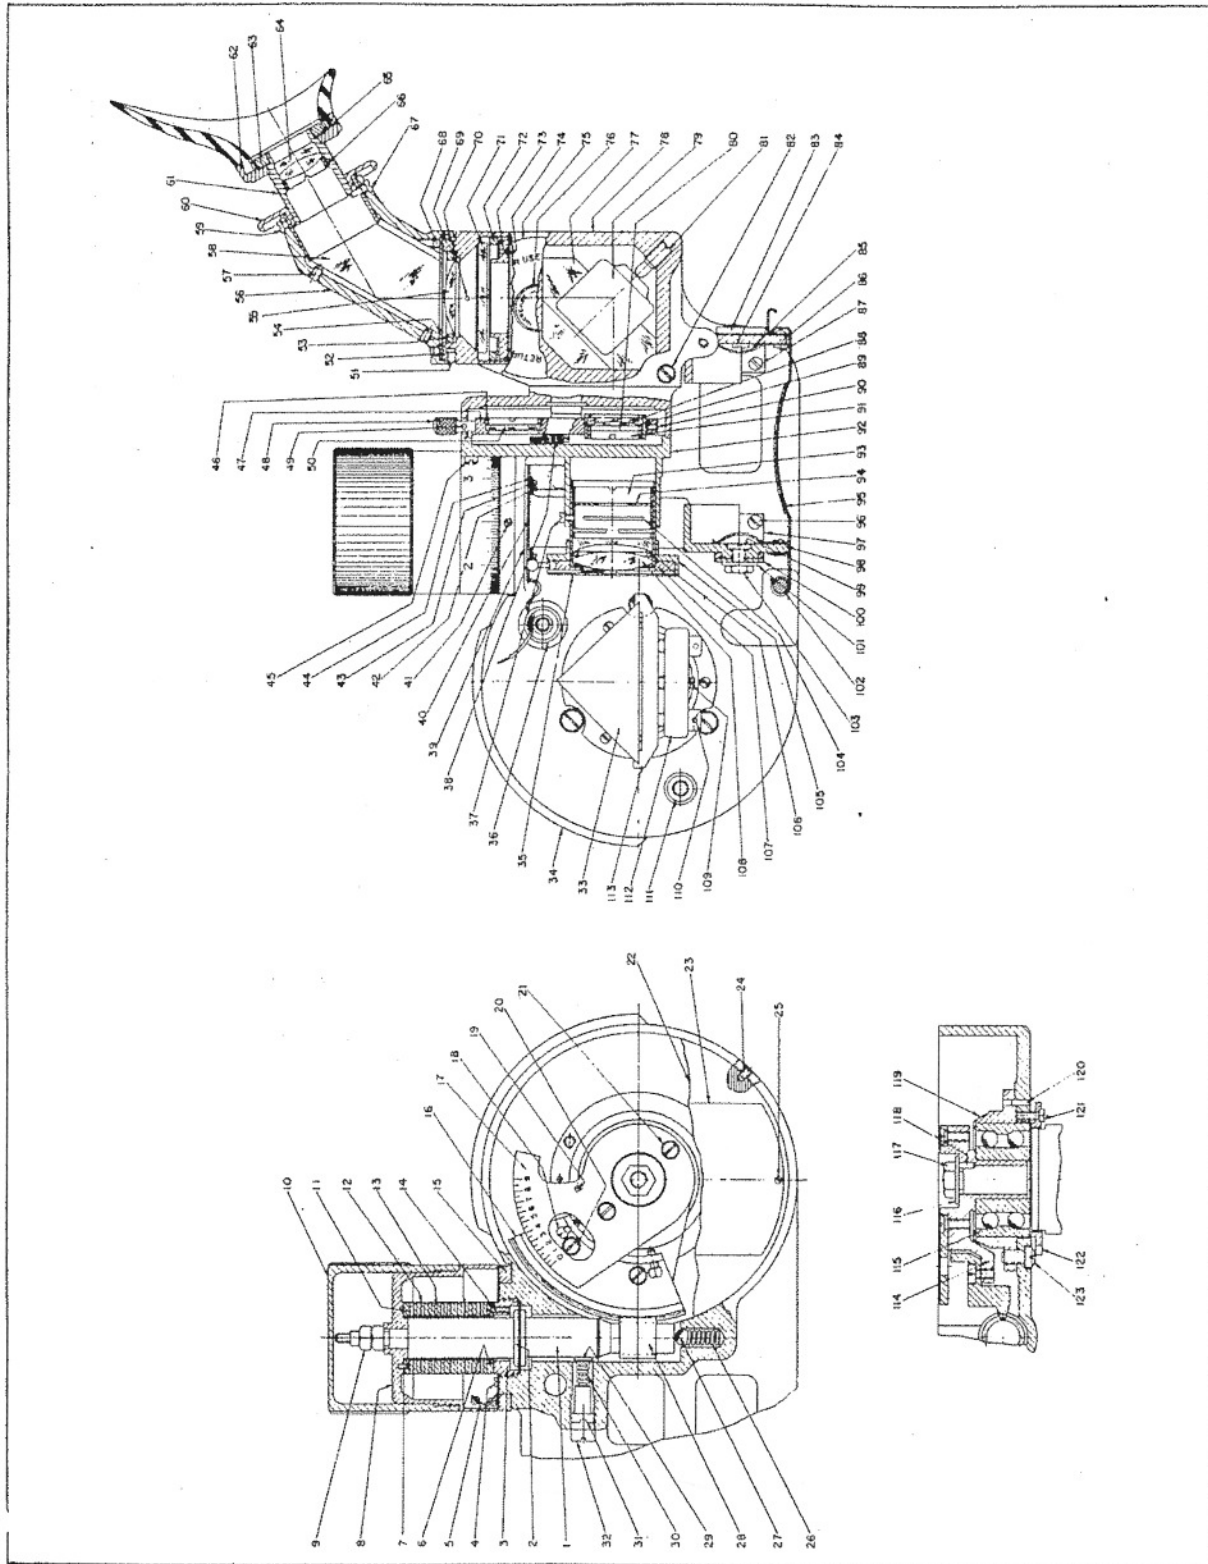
Right Side - Sectional View - Aircraft Sextant -
